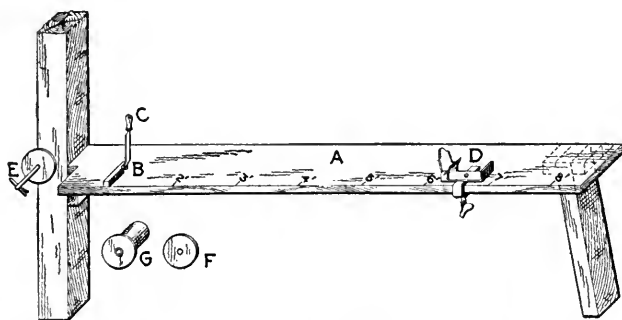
FUSE-CUTTING TABLE WITH KNIFE, PINS AND CLIP CLAMP.
